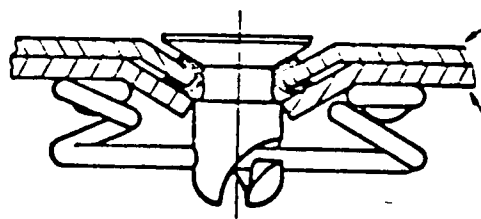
Screw lock washer assembly. a) Conical spring washer sems.
